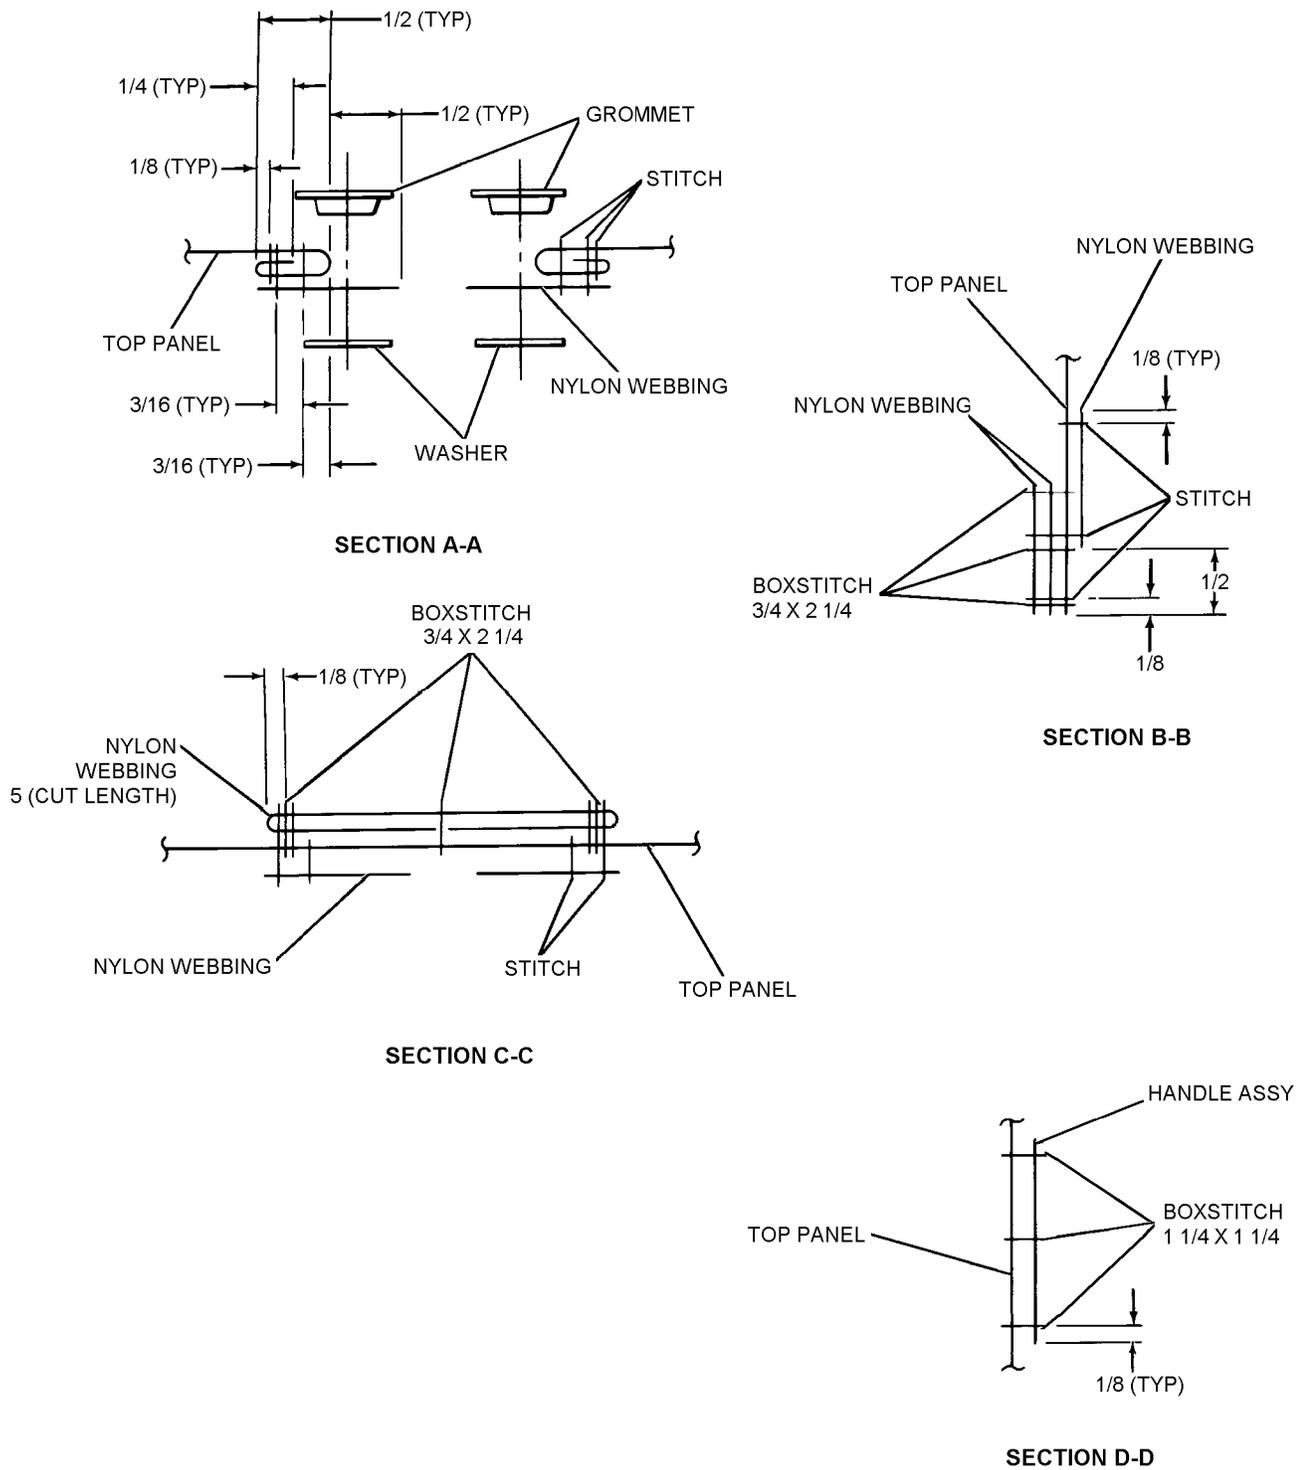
Top Panel Assembly, Survival Equipment Container Assembly (Sheet 2 of 2)
